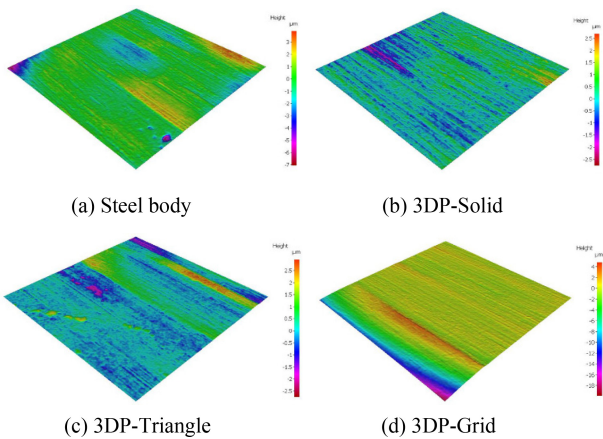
3D geometry of machined AL6061 surface (At Fr = 0.3 mm/rev)
